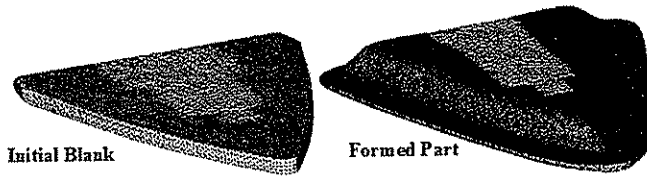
Microforming of cutting blades (Blank thickness = 0.1 mm Final blade thickness = 0.01 mm)
